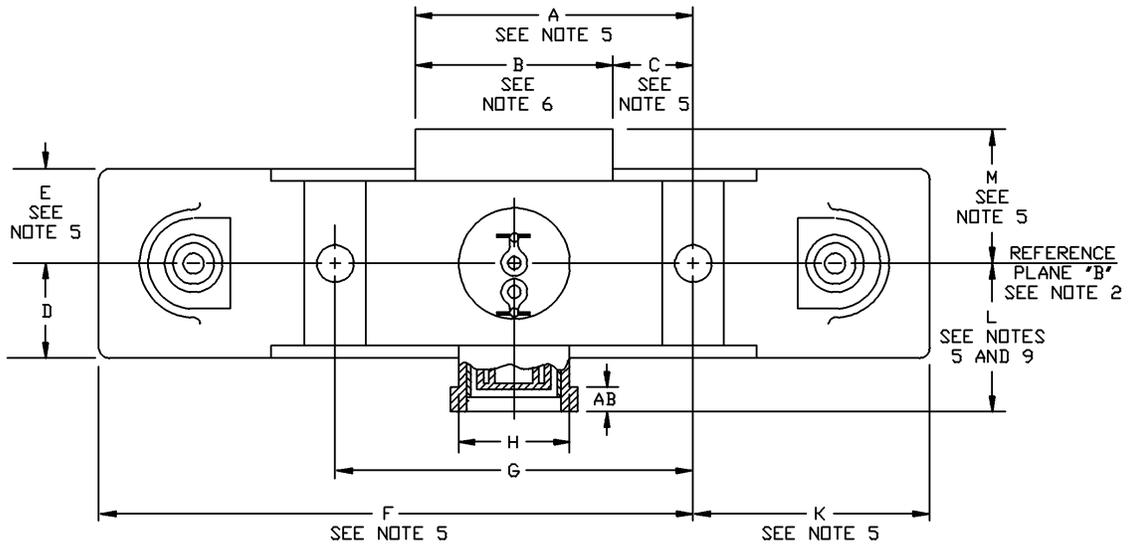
Outline and dimensions. - (Top view) - Continued.
